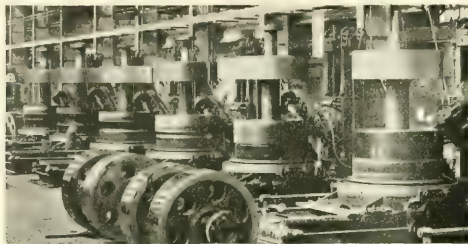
GROUP OF MACHINES FOR TURNING GEAR BLANKS
